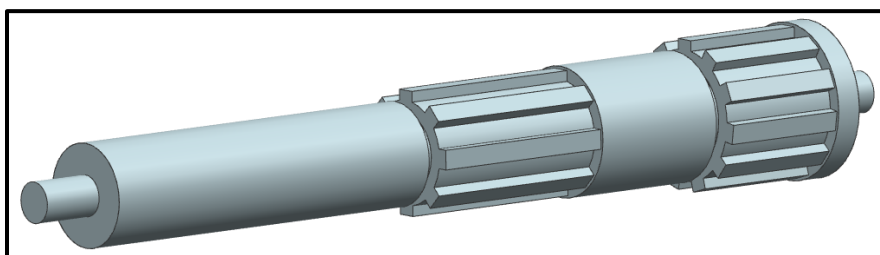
The final middle shaft highlighting the use of shoulders and splines to secure gears.
